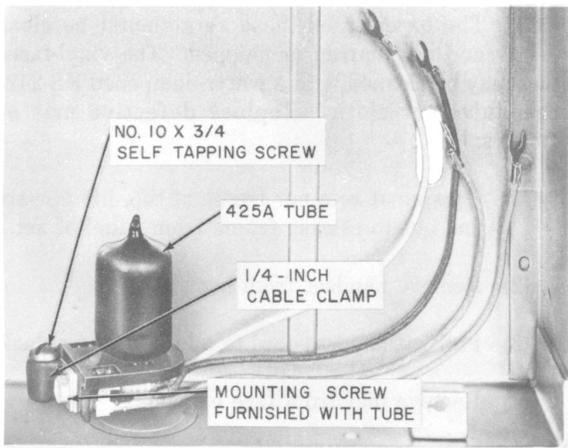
Installation of Cold-Cathode Tube in Apparatus Box
